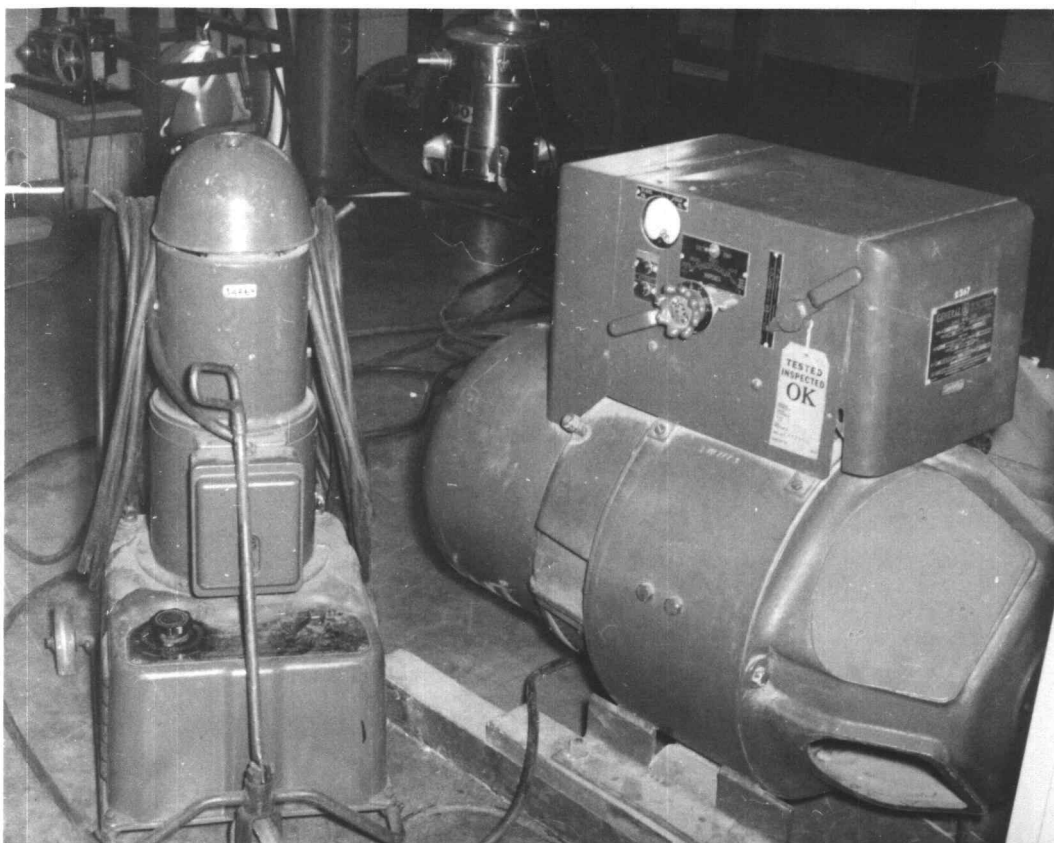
Electric welding generators used during runs. They are hooked in series to give maximum voltage output.
